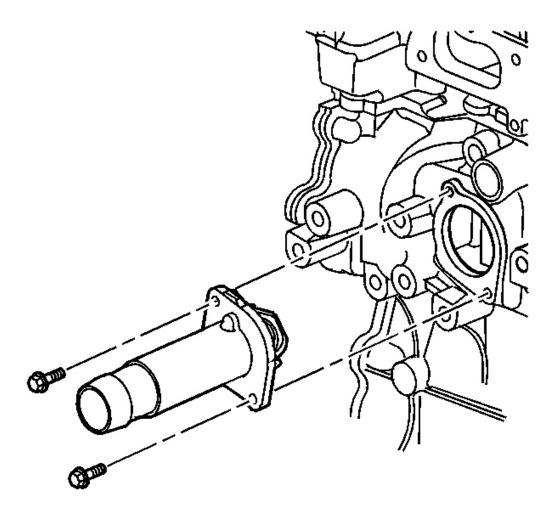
View Of Thermostat Housing Courtesy of GENERAL MOTORS CORP.
